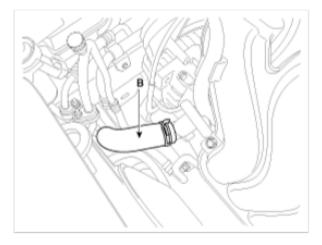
Identifying Radiator Lower Hose Courtesy of HYUNDAI MOTOR AMERICA
